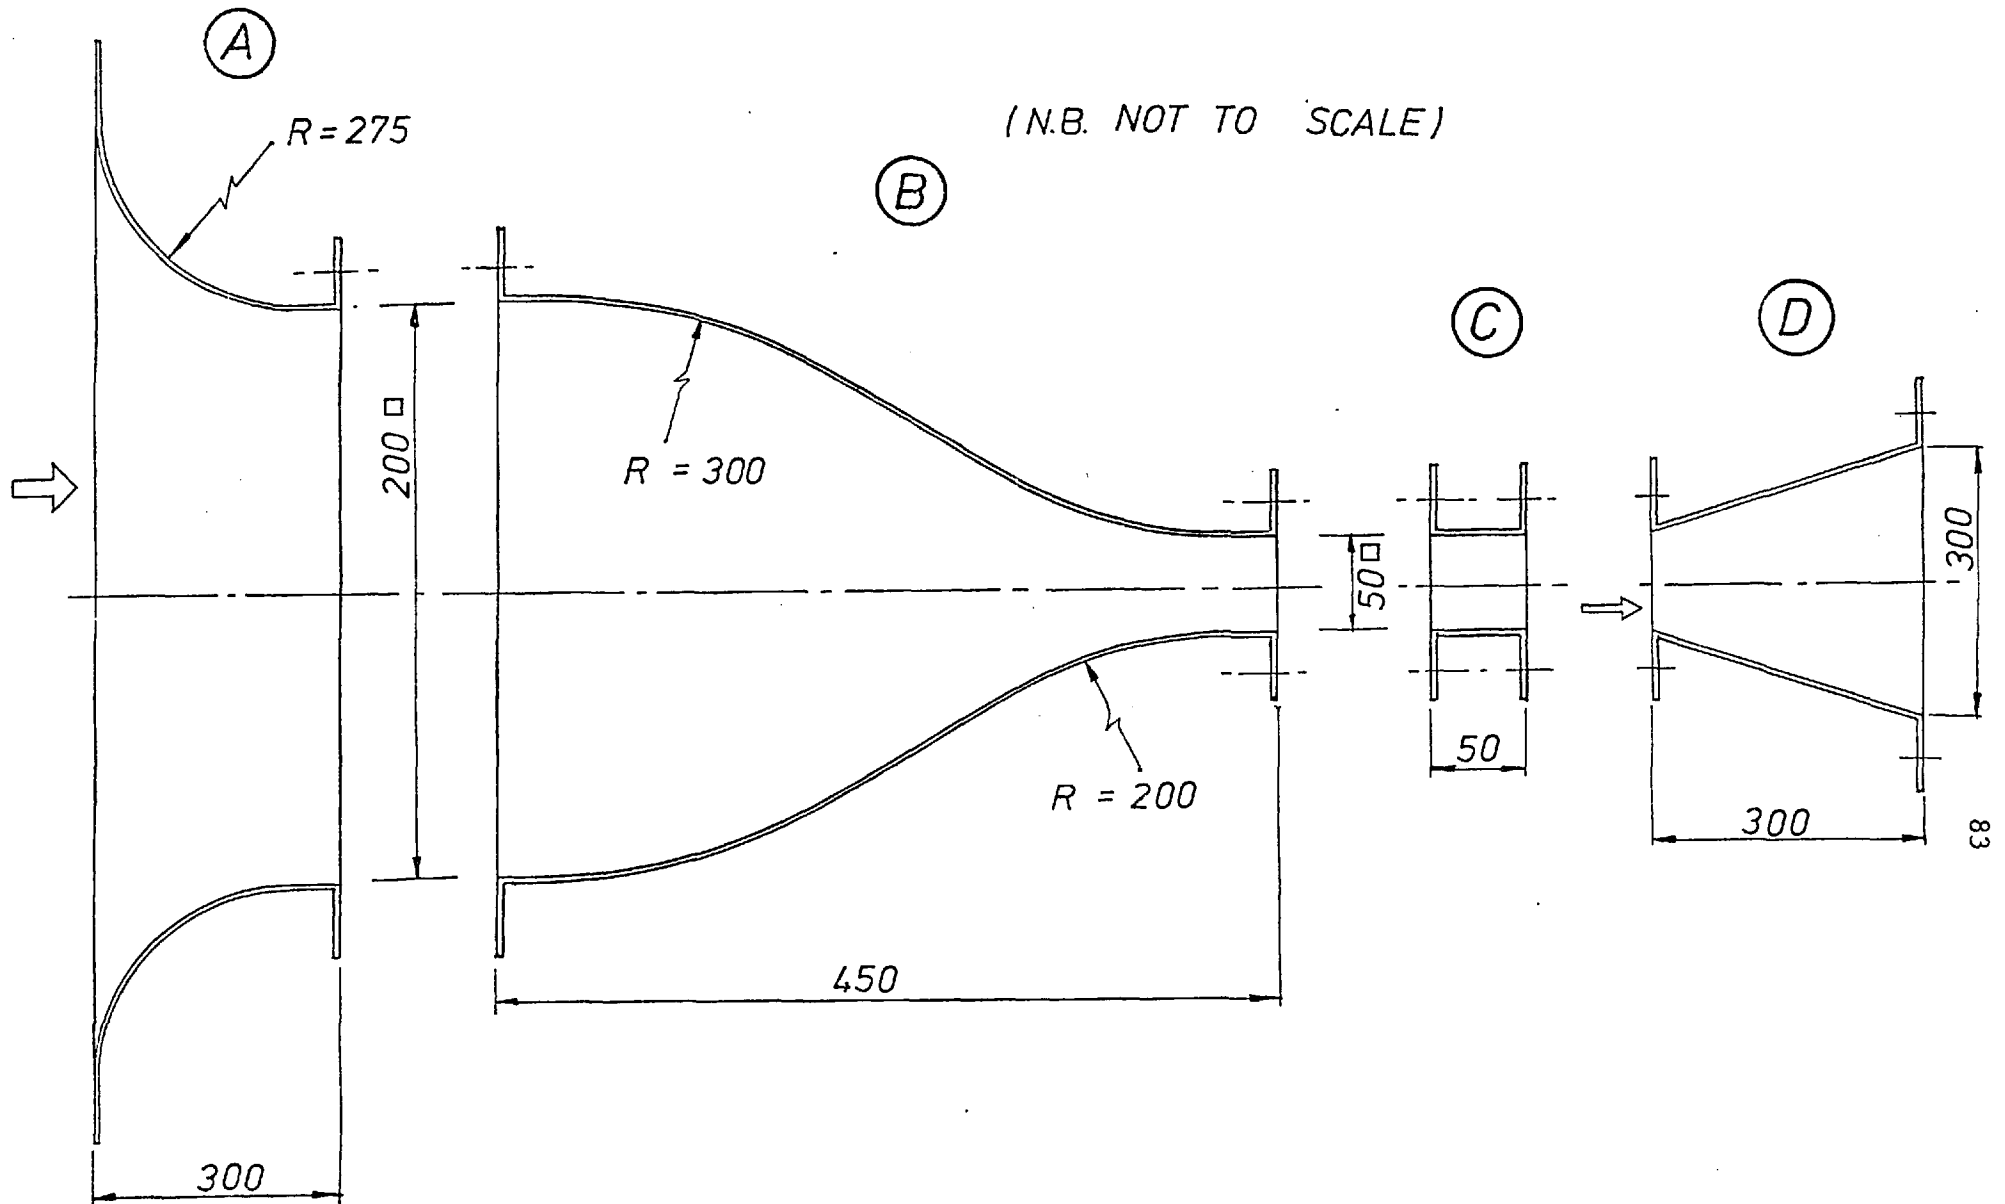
Details of the Bellmouth (A), Contraction-section (B), and connecting sections (C) and (D).
